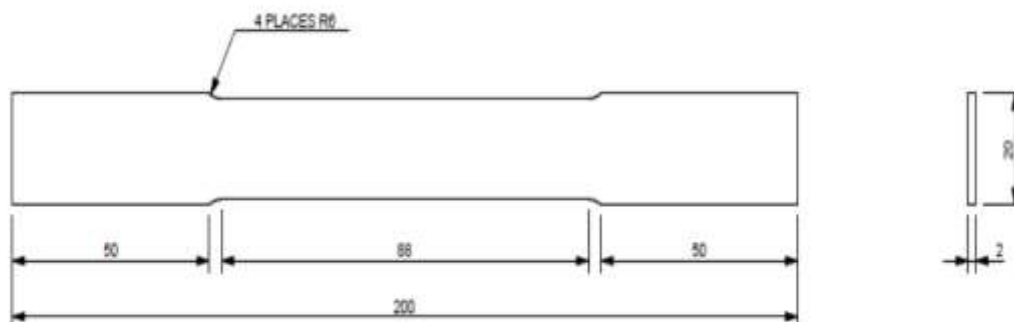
Tensile ASTM machining guidelines (ASTM,2018).
